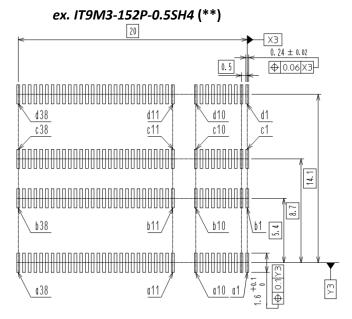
Plug Stencil Patterns (dimensions in mm)
